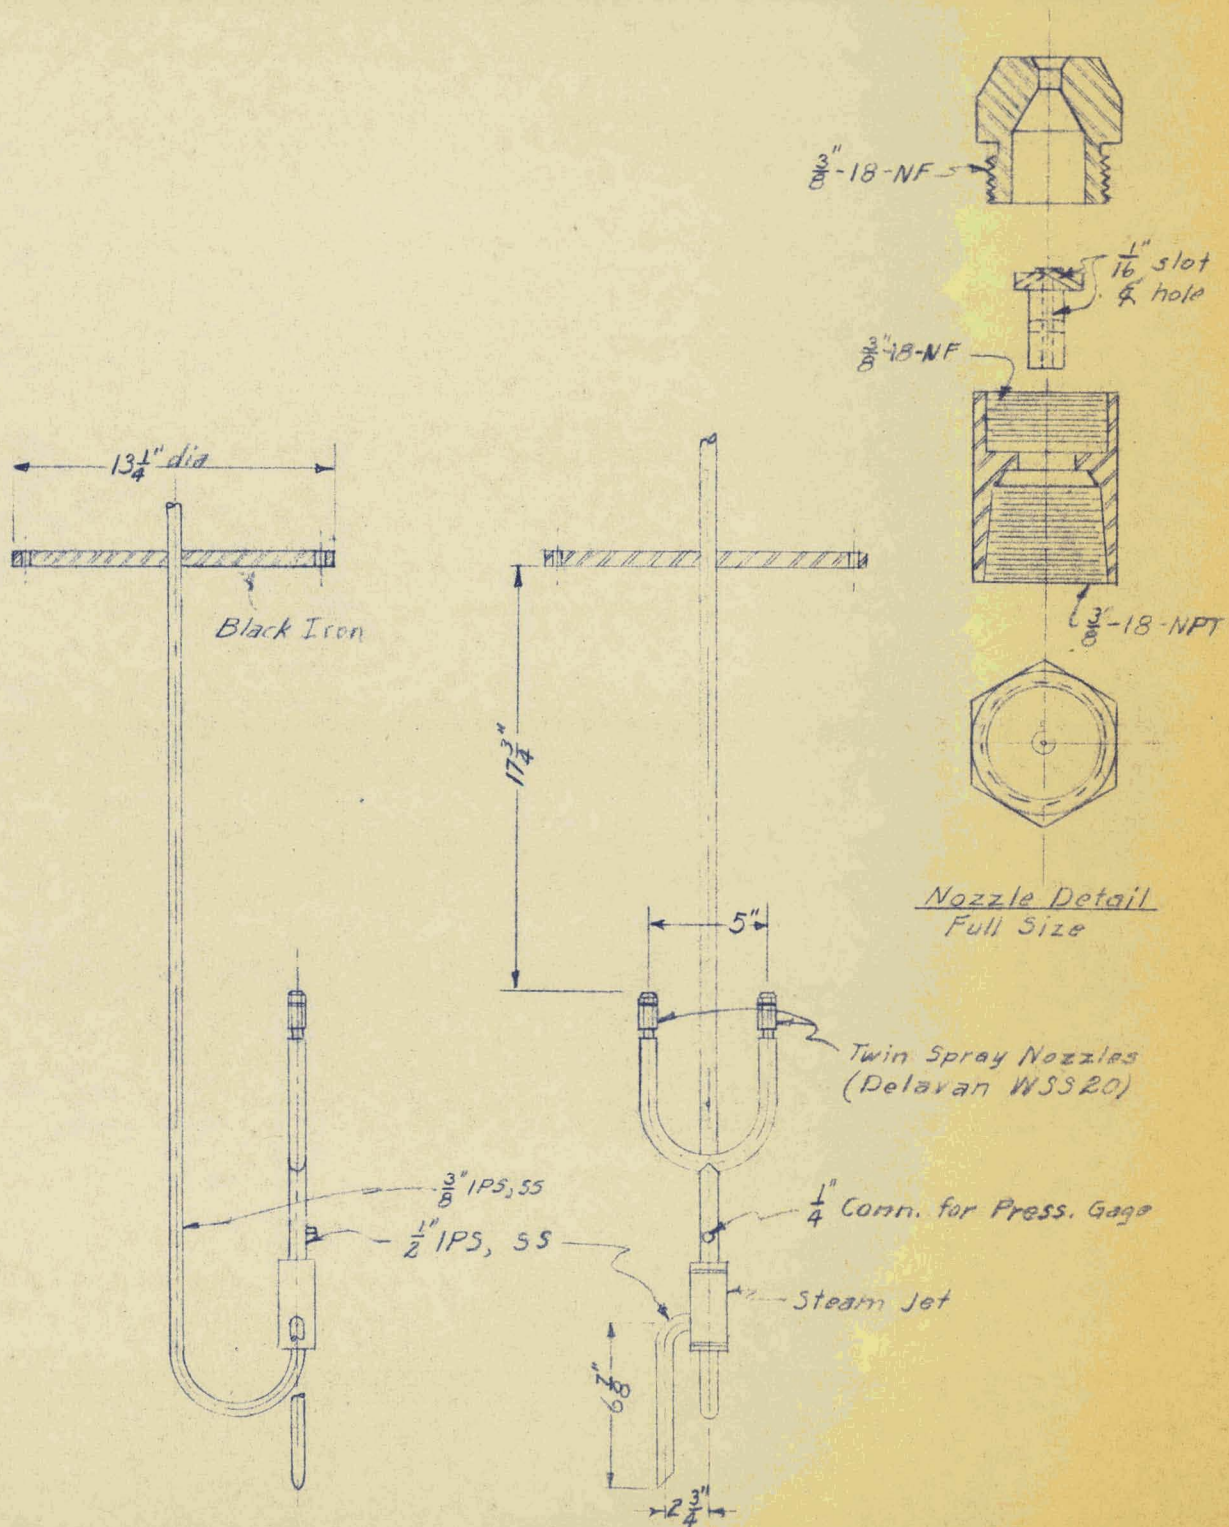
JET & NOZZLE ASSEMBLY & NOZZLE DETAIL
